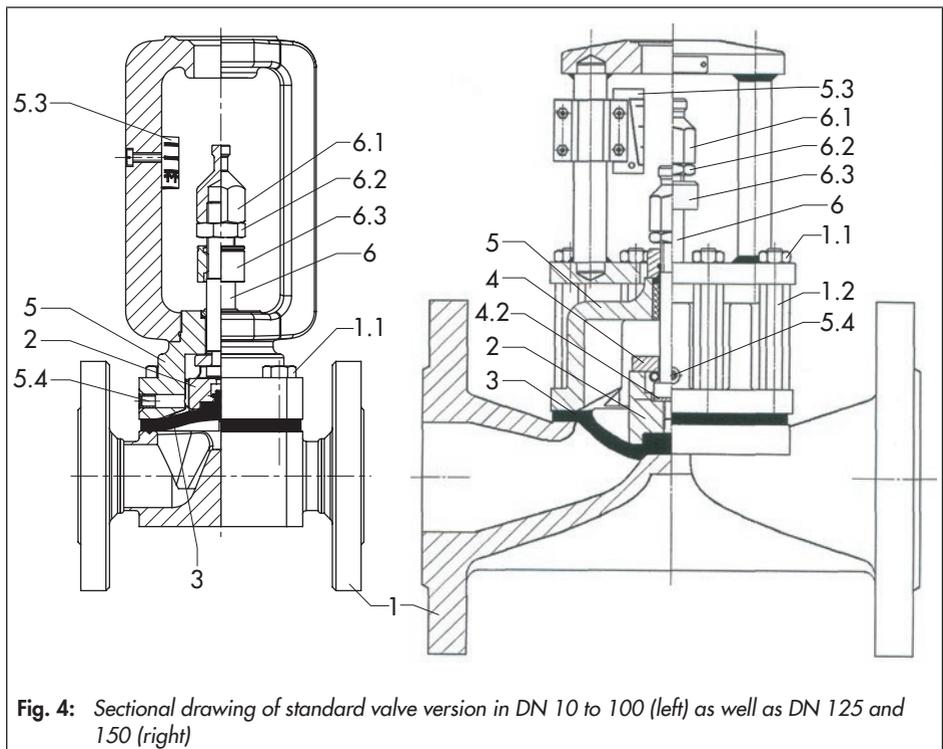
Sectional drawing of standard valve version in DN 10 to 100 (left) as well as DN 125 and 150 (right)
